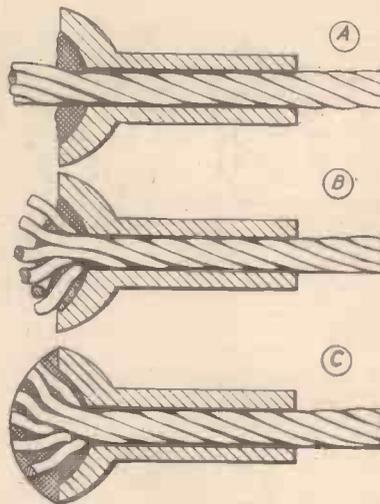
A: cable is soldered into the nipple; B: the end is splayed; C: the whole is fixed and sealed with a blob of solder.
